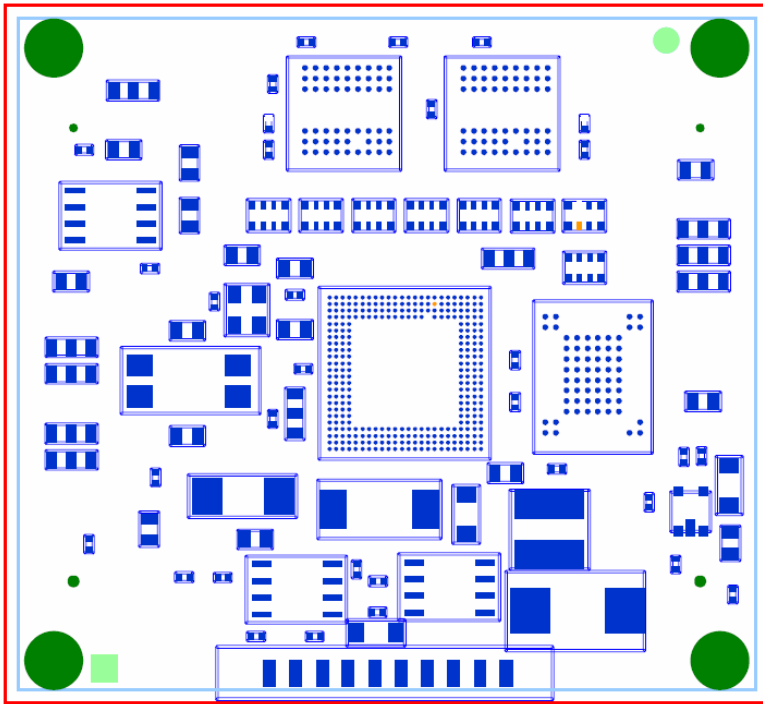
phyCORE-LPC3180 Component Placement, Top View
